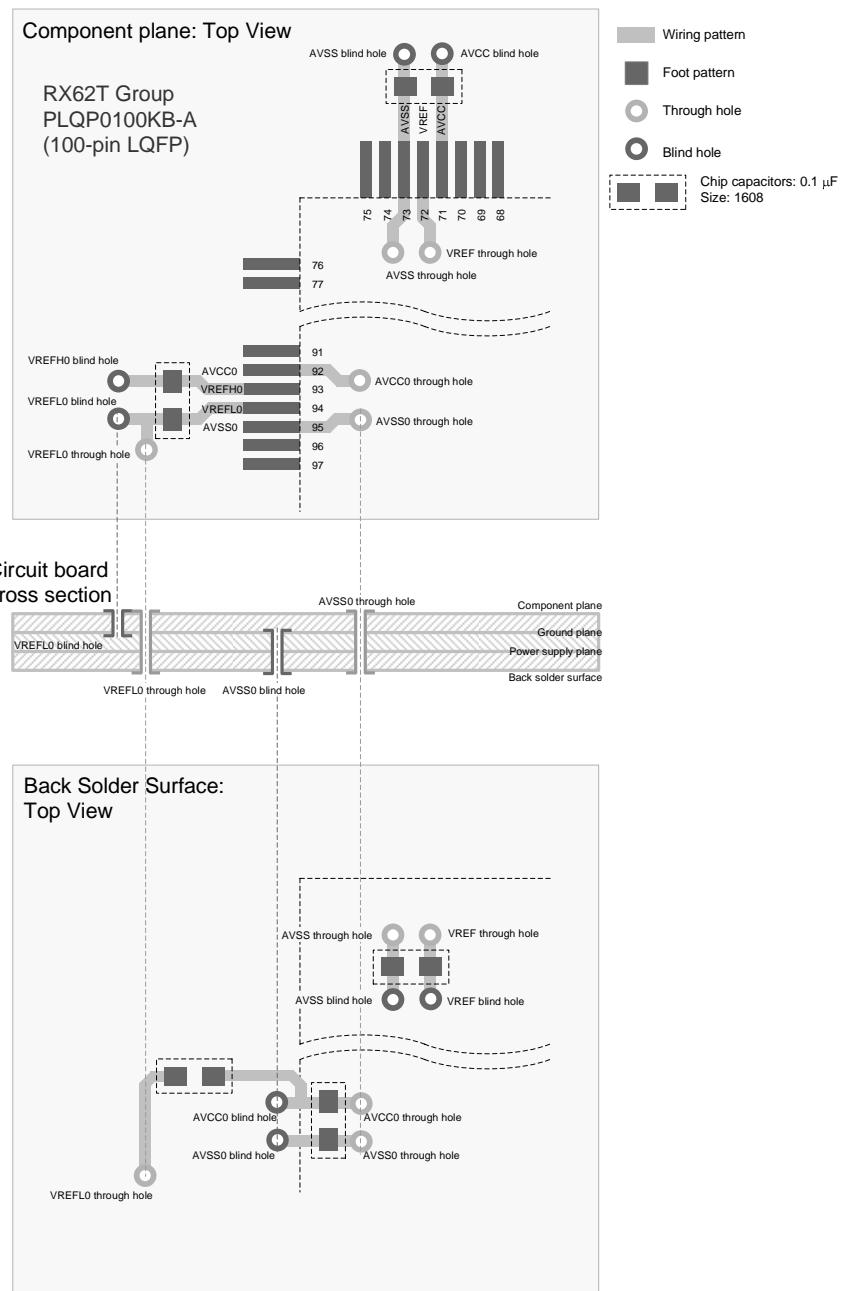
RX62T 100-Pin LQFP Package Power Supply Pin Capacitor Layout Example
